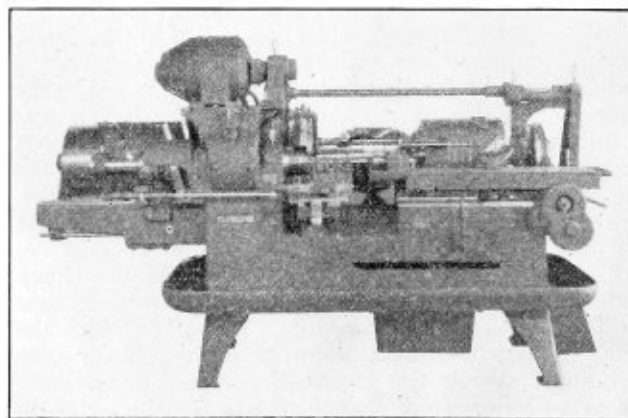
An automatic machine for the manufacture of staybolts from bar stock
